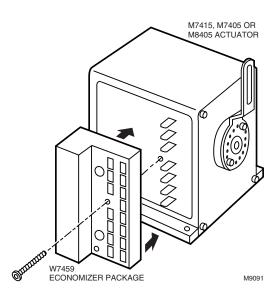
Mounting W7459 on M7415 or M8405 Damper Actuator.
